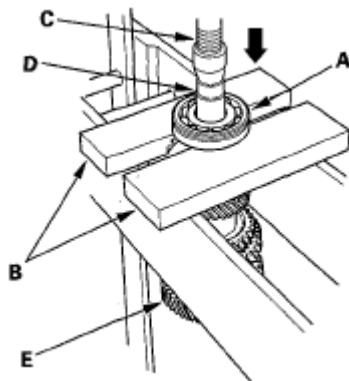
Pressing Countershaft Out Of Ball Bearing
